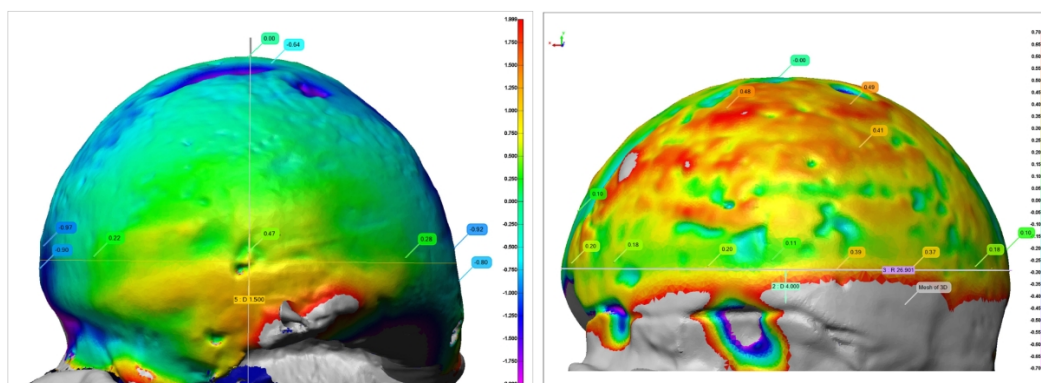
Example output from laser scanner for mould 1 (left) and mould 7 (right)
